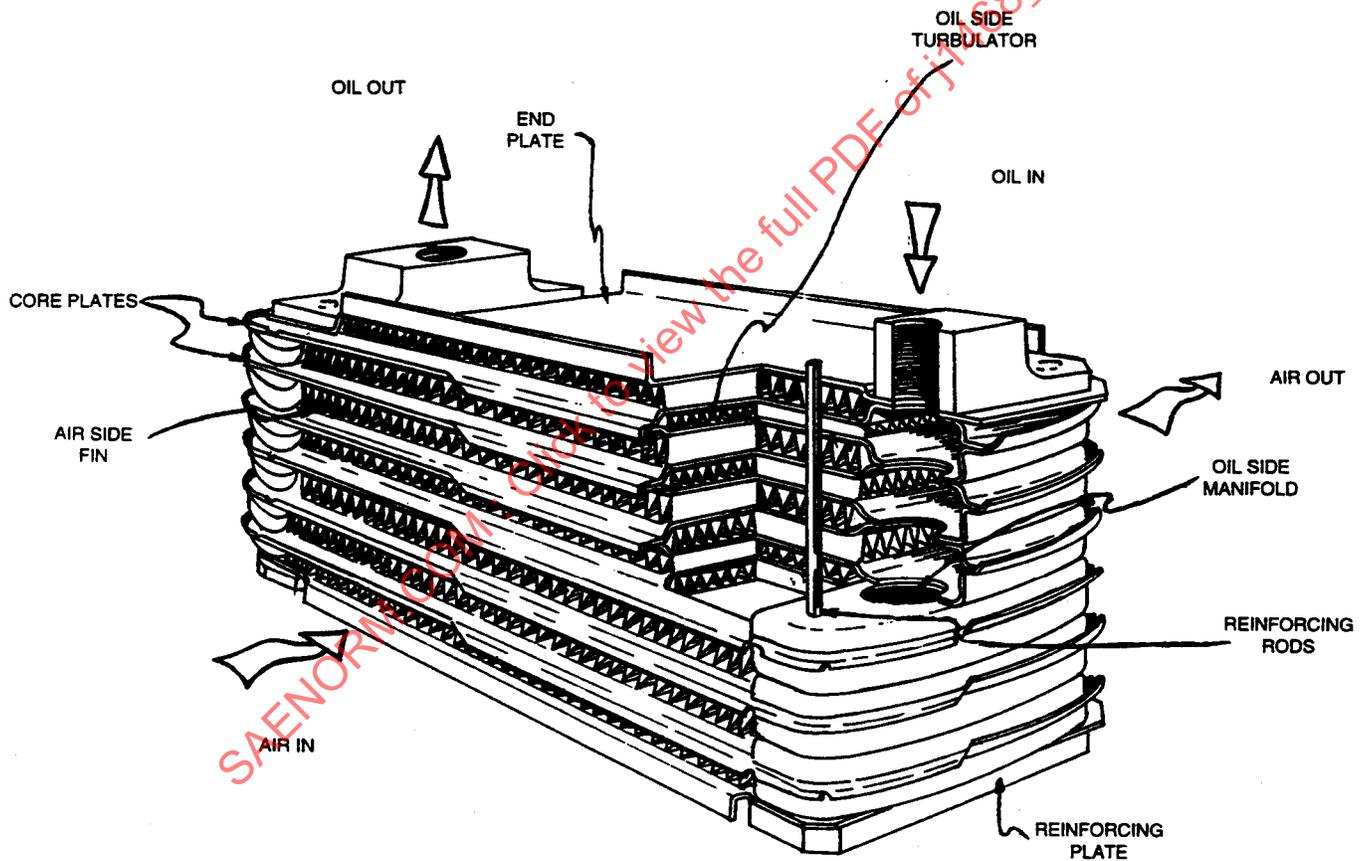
PLATE FIN SEPARATOR OIL TO AIR COOLER
